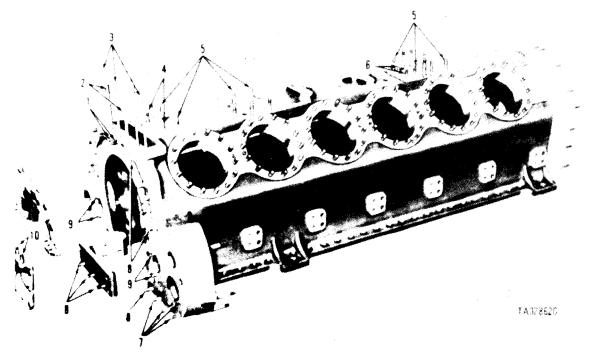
Crankcase studding, 3/4 left rear-exploded view.
